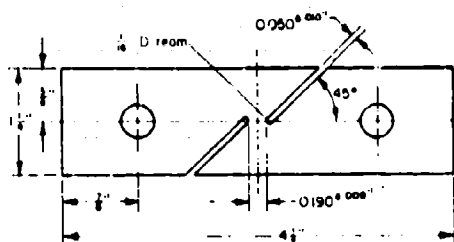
SHEET SHEAR TEST SPECIMEN
